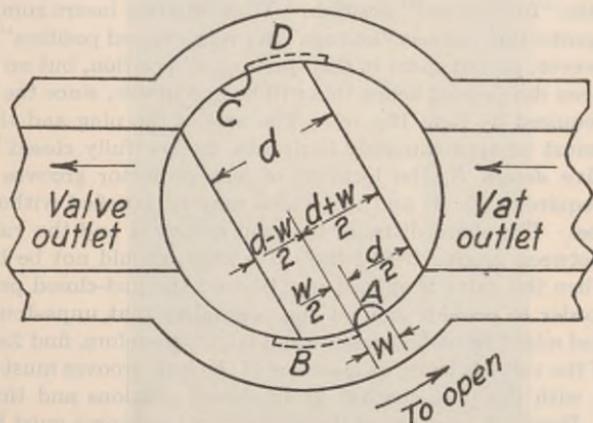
Valve design A, horizontal section through axis of plug channel, valve in "Just-closed" position.
